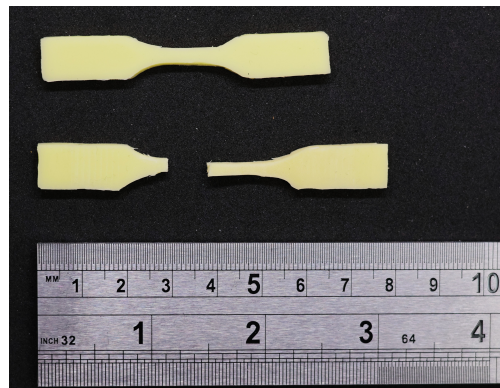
Representative ASTM D638 Type V specimen before testing and after failure. Note: The top part of the scale is given in millimeters.
